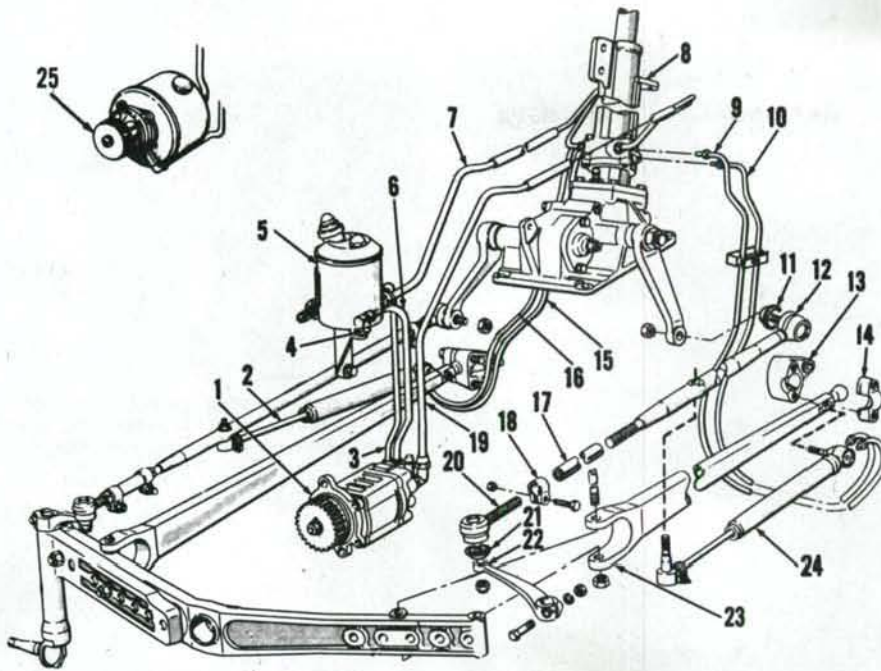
Drawing of 2000 and 3000 power steering system. For exploded view of steering gear and valve assembly (8), refer to Fig. 12. Exploded view of power steering pump (1) is shown in Fig. 7, late pump (25) in Fig. 10.
